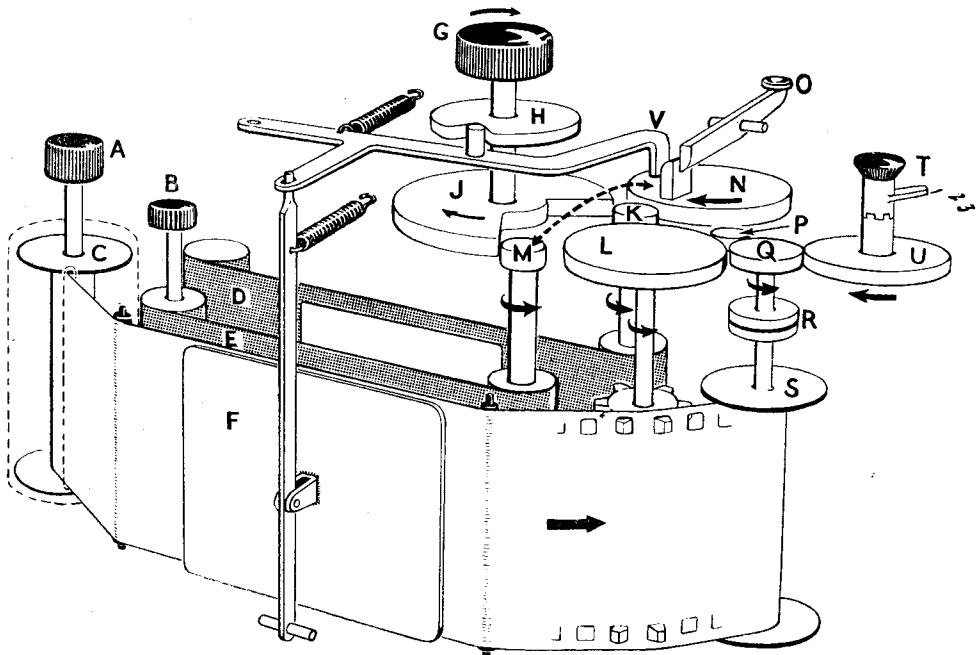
Essential parts of a shutter and film wind mechanism, adaptable complete or in part to almost any size of camera. Arrows indicate direction of movement during winding: camera is shown set. A—film rewind knob; B—blind tension control; C—rewind spool (in cassette for 35 mm.); D—capping blind; E—exposure blind; F—film pressure plate; G—winding knob; H—cam-operates F and shutter stop V during winding, and completes operation before J meshes with L; J—gap wheel,  $\frac{3}{4} \times 48$  teeth = 36: makes one complete turn and drives K, L, M in that order; K—capping blind pinion—9 teeth: 4 turns; L—film wind pinion—36 teeth: 1 turn; M—exposure blind pinion—9 teeth: 4 turns. By gears omitted from drawing, it drives N; N—shutter control wheel—36 teeth: 1 turn; O—trigger; P—film wind idler; Q—take-up pinion—24 teeth:  $1\frac{1}{2}$  turns; R—friction clutch; S—film take-up spool; T—exposure counter: reset by de-clutching; U—counter gear—39 teeth:  $1\frac{1}{12}$  turns (for 12 exposures); V—shutter stop: limits blind travel at end of exposure
